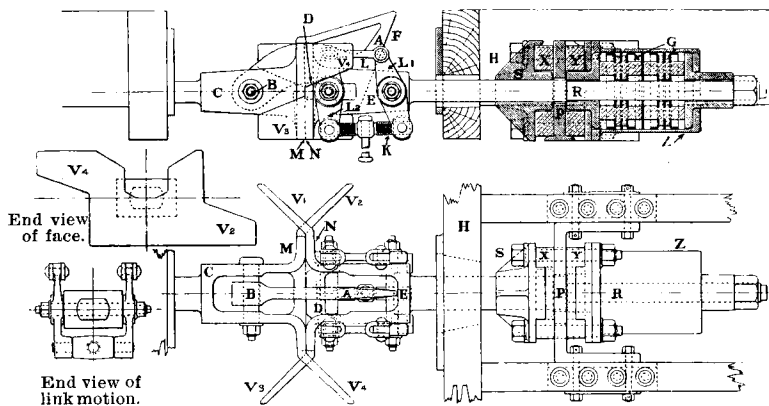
Flexible Centre Buffering and Draw Gear and Self-centring Coupler (Jones').
